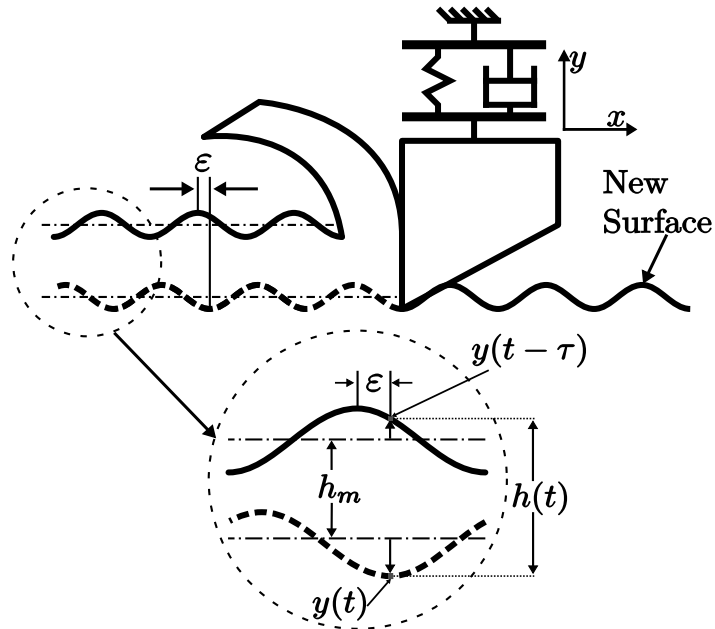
Magnified single point cutting process on an unfolded workpiece describing the regenerative mechanism.
